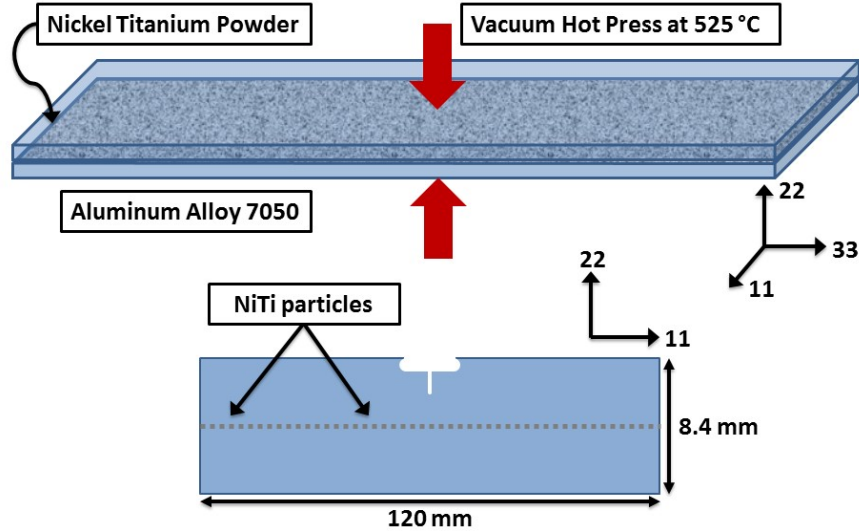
Schematic of hot-pressing and machining of test specimens.
